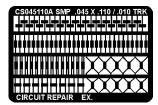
Select a replacement surface mount pad that matches the missing pad.
